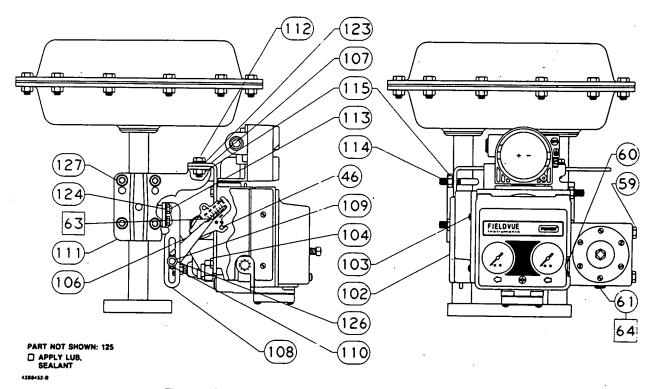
Type DVC5010 Series Digital Valve Controller Mounted on Type 1250 Actuator with Integrally Mounted Filter Regulator
